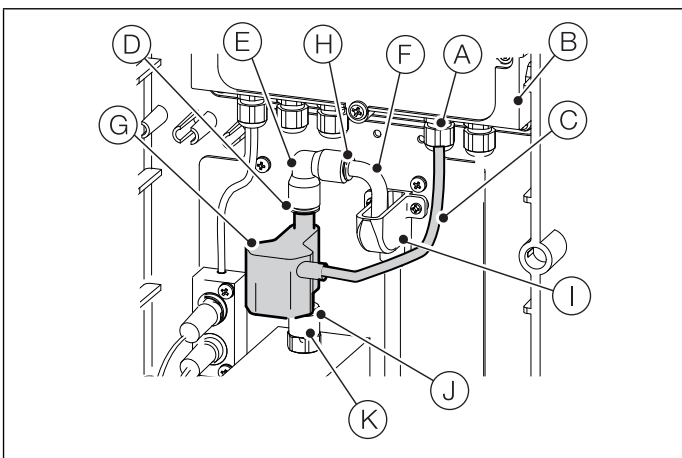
Replacing the flowmeter assembly and flowmeter cable
